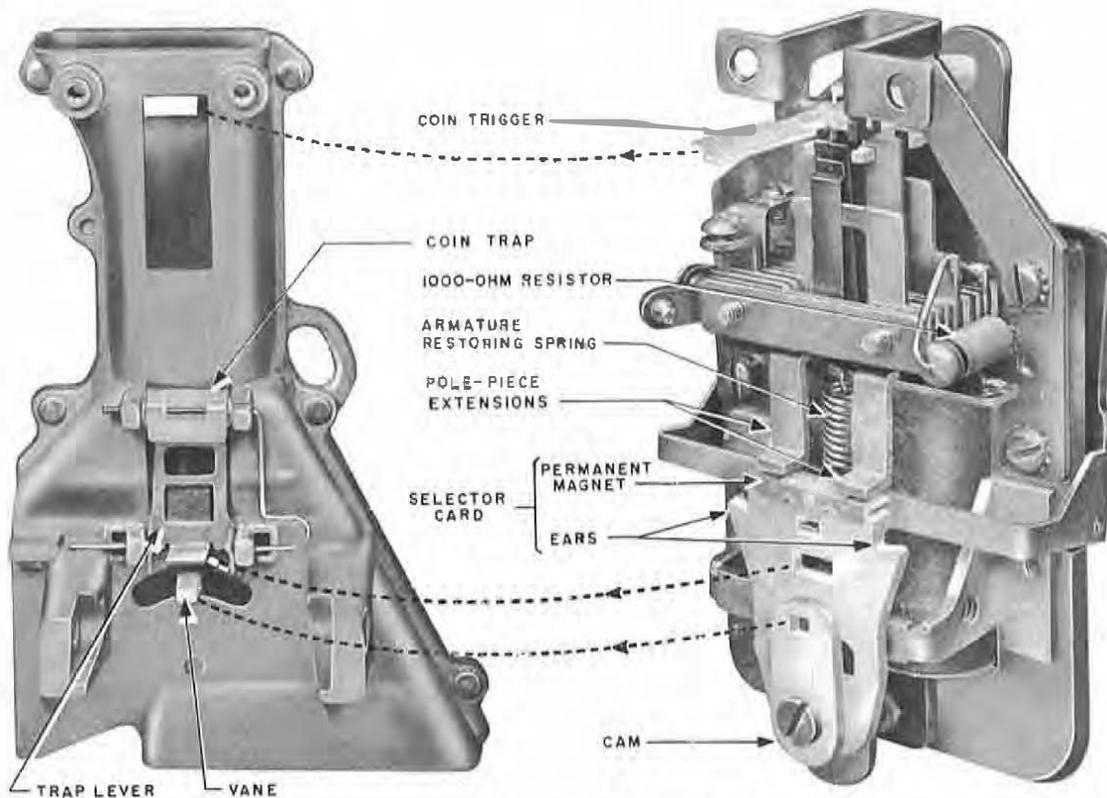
Coin Hopper and Rear View of P-10E786 Coin Relay
